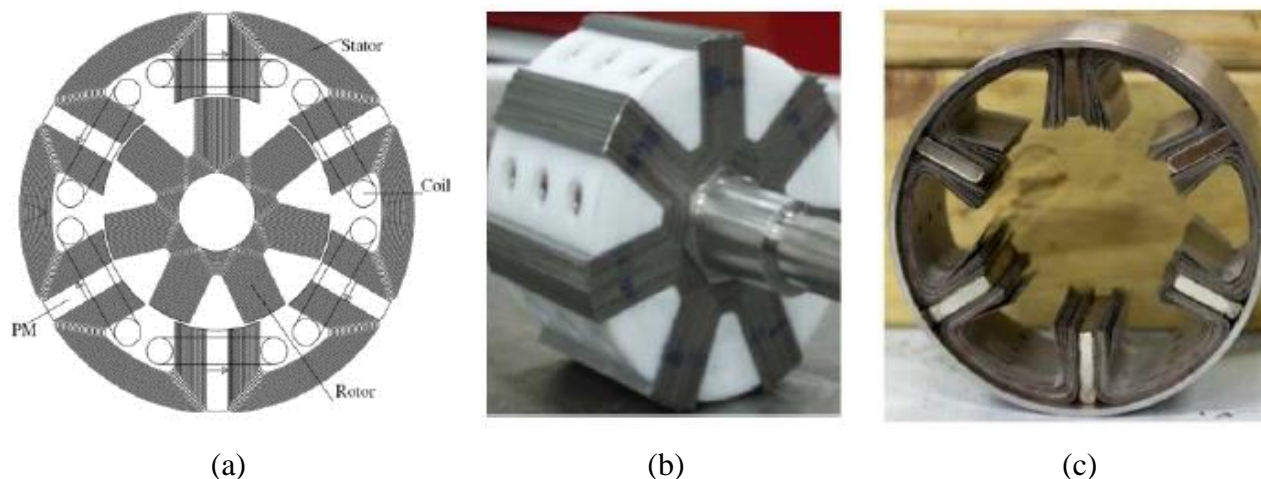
Axial laminated 6/7 FSPM machine (a) Section view (b) Prototype rotor (b) Prototype stator [110]
